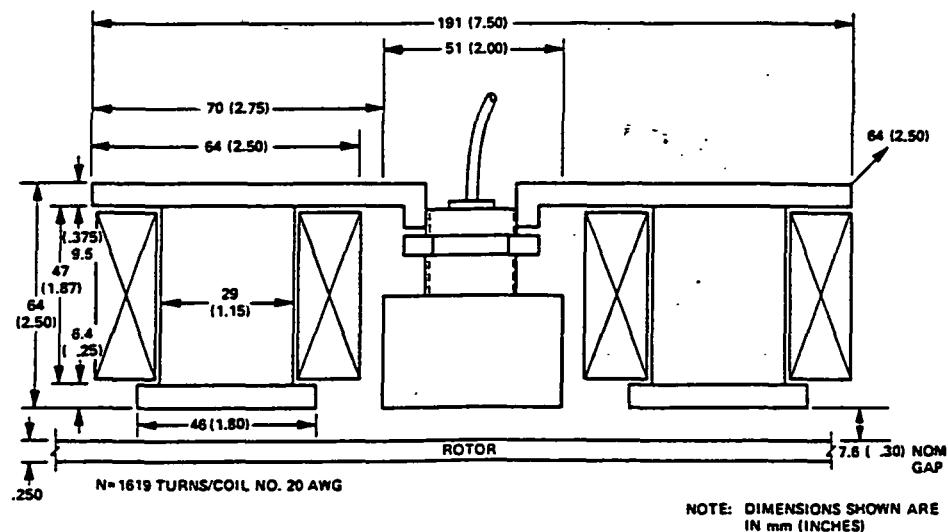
Axial MBA Configuration (lower coils omitted for clarity)
